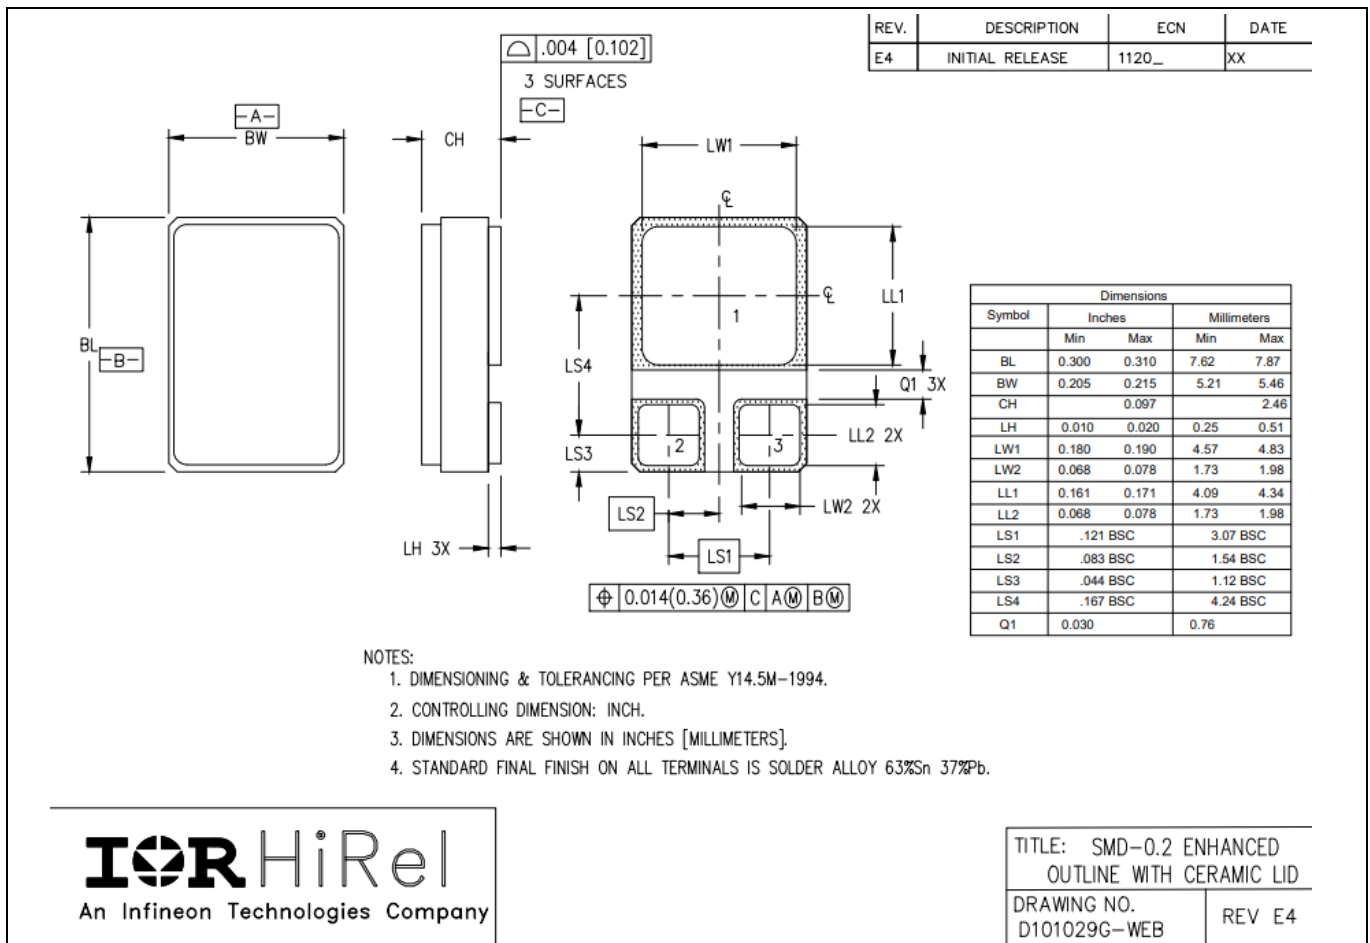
SMD-0.2e package drawing (see website for all package drawings)
